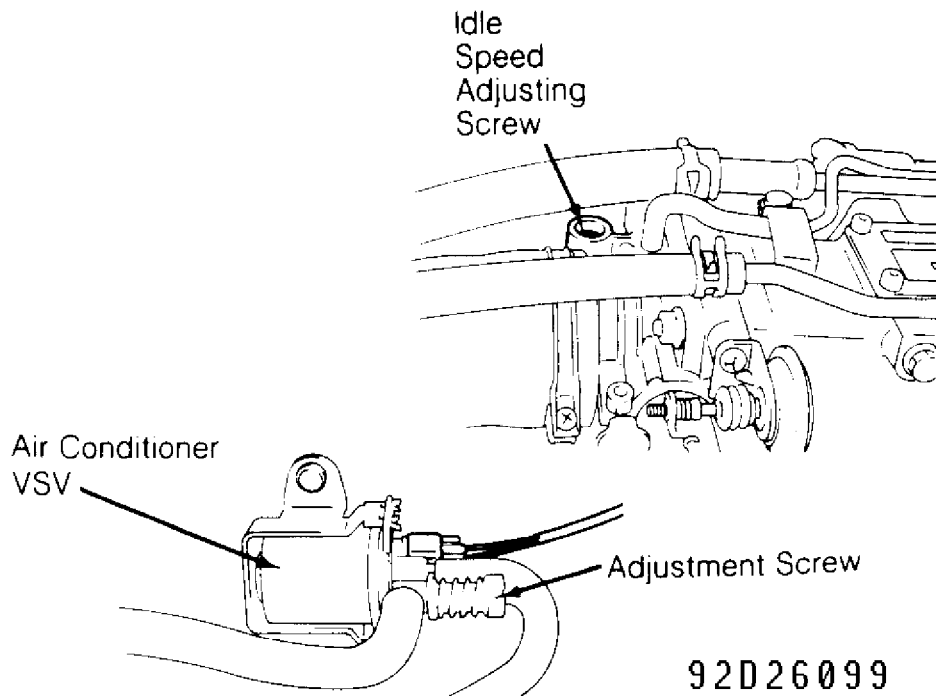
Identifying Typical Idle Adjustment System (Swift)
